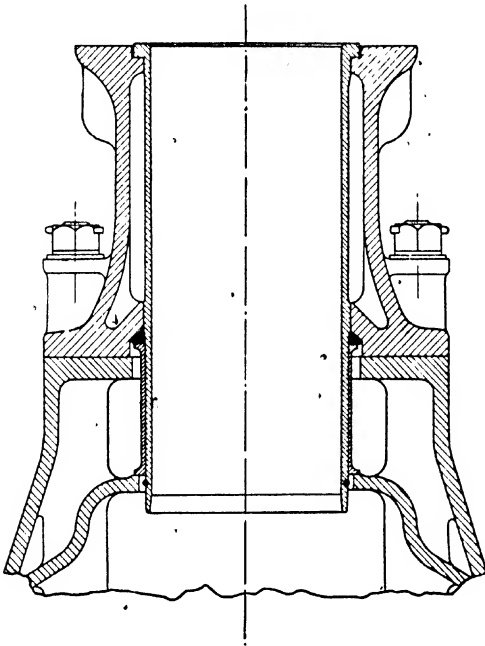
Section of Cylinder showing loose hardened Steel Liner sealed by Rubber Ring
